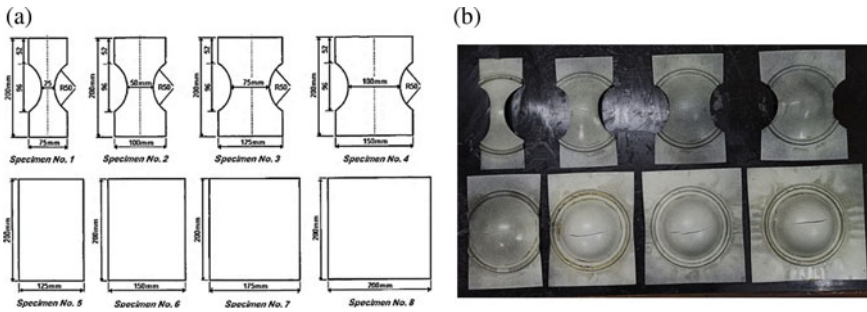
a Specimen dimensions for Nakajima test as per ASTM E2218-02; b failed AA5052 samples after the test
